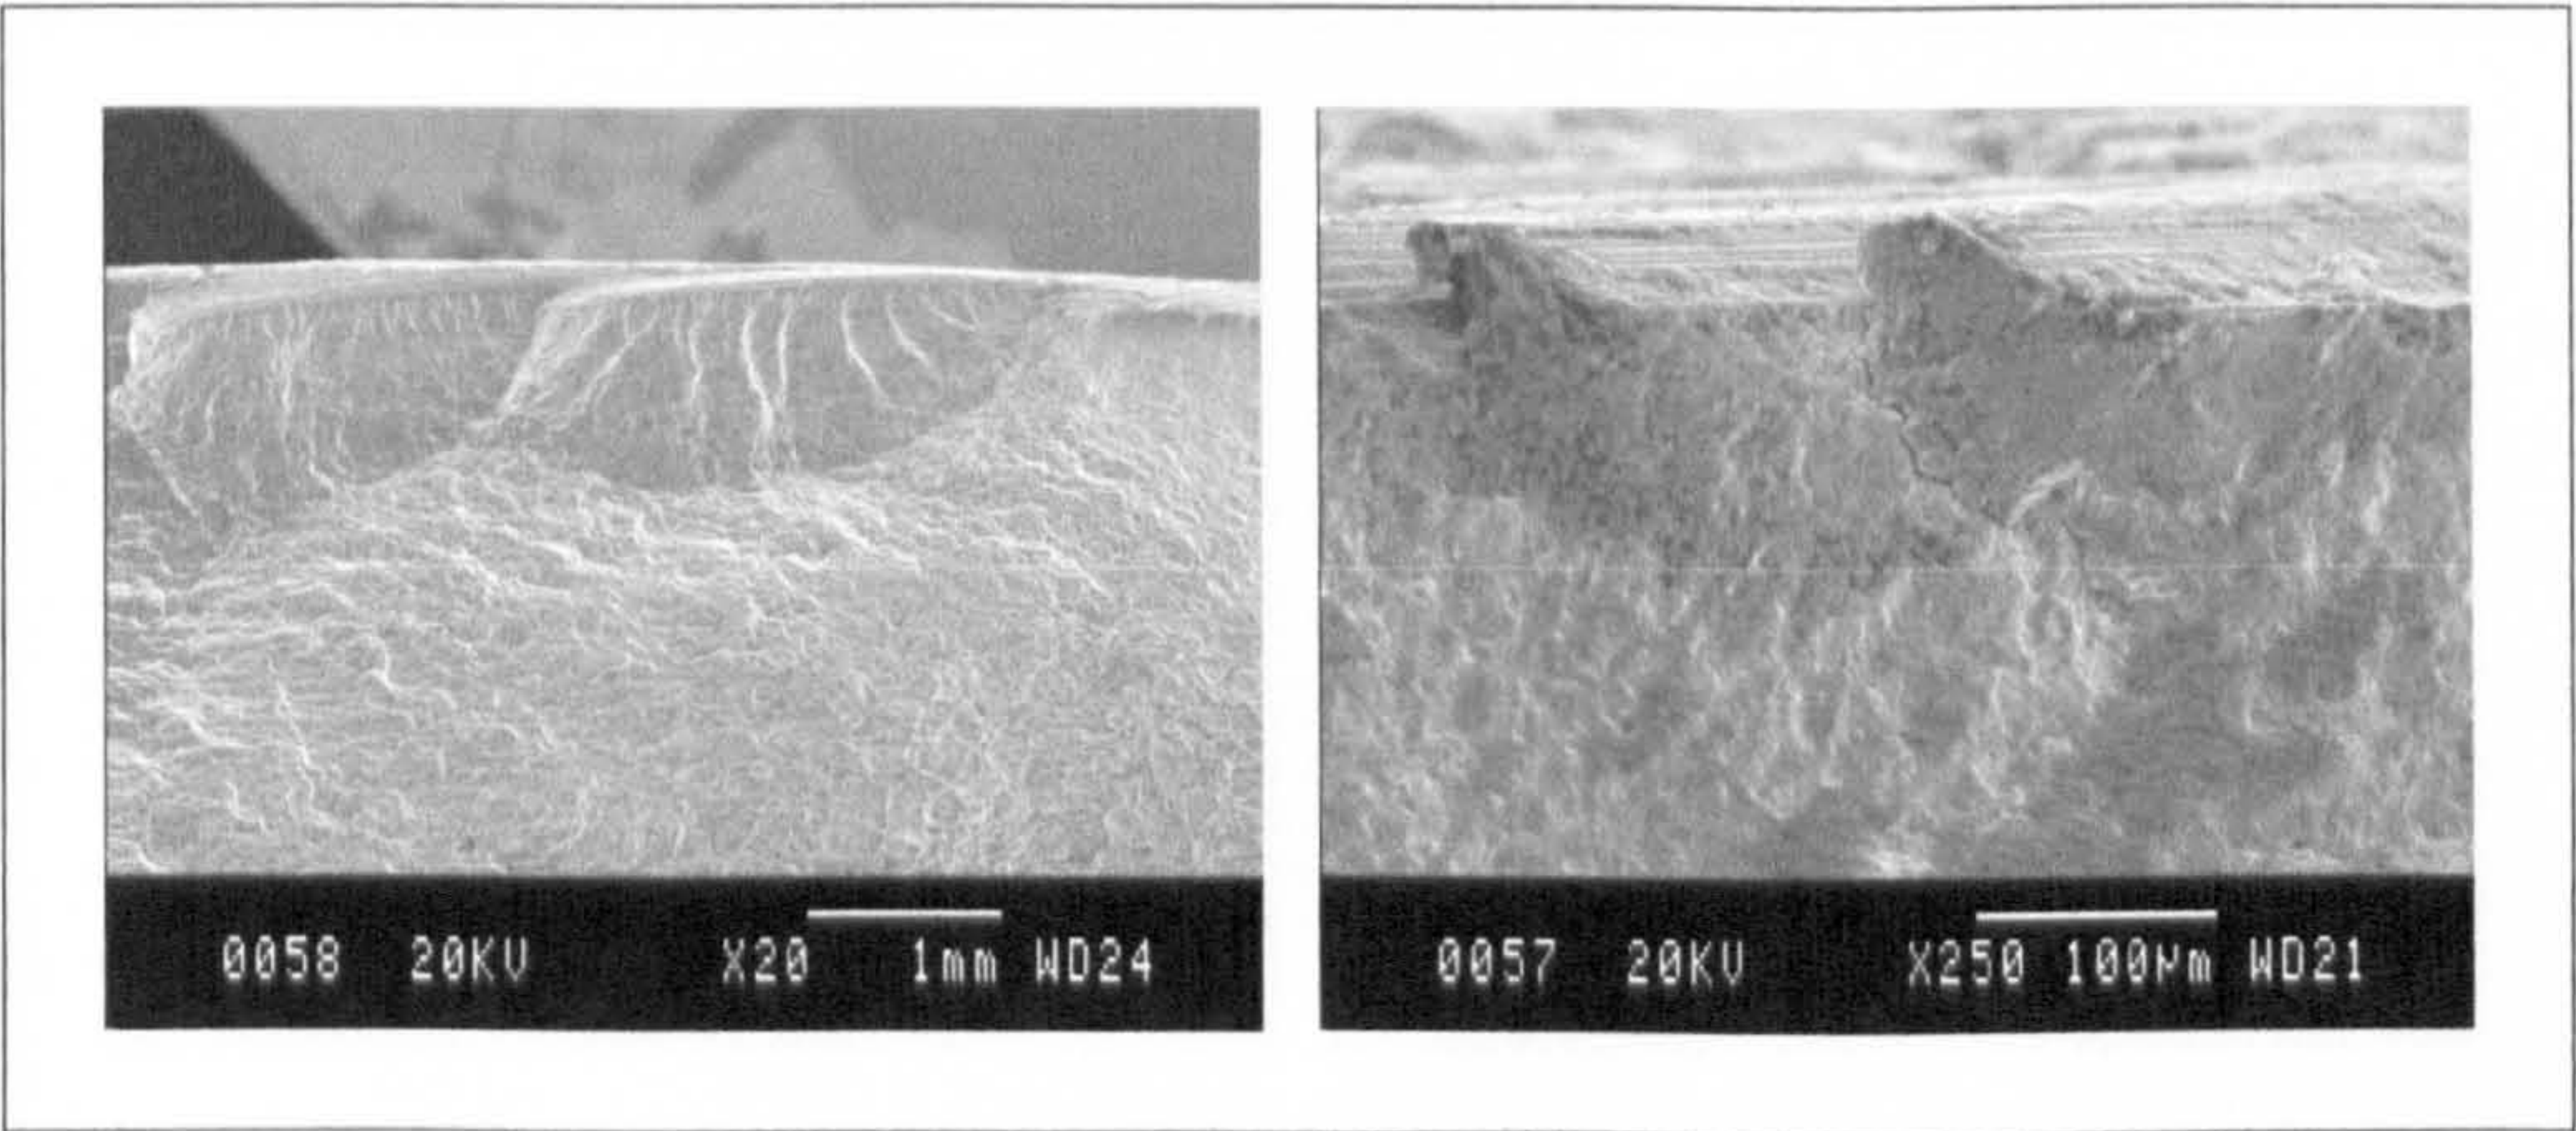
Fatigue crack initiation at circular score marks on weld surface (left & right) (FS SP 2).
